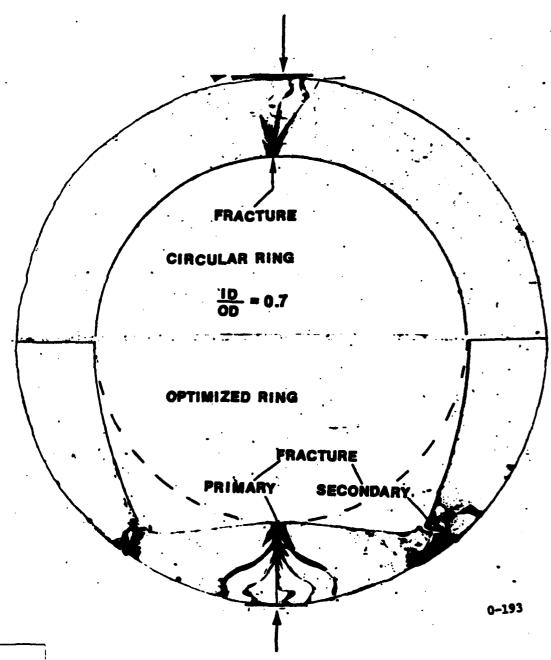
FRACTURE MECHANISMS IN THE CIRCULAR AND OPTIMIZED RINGS
